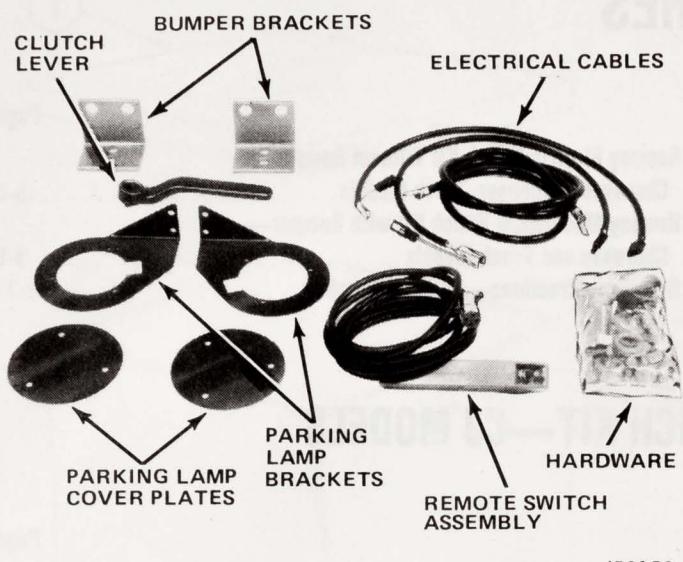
Ramsey Electric Winch Kit Mounting Components
